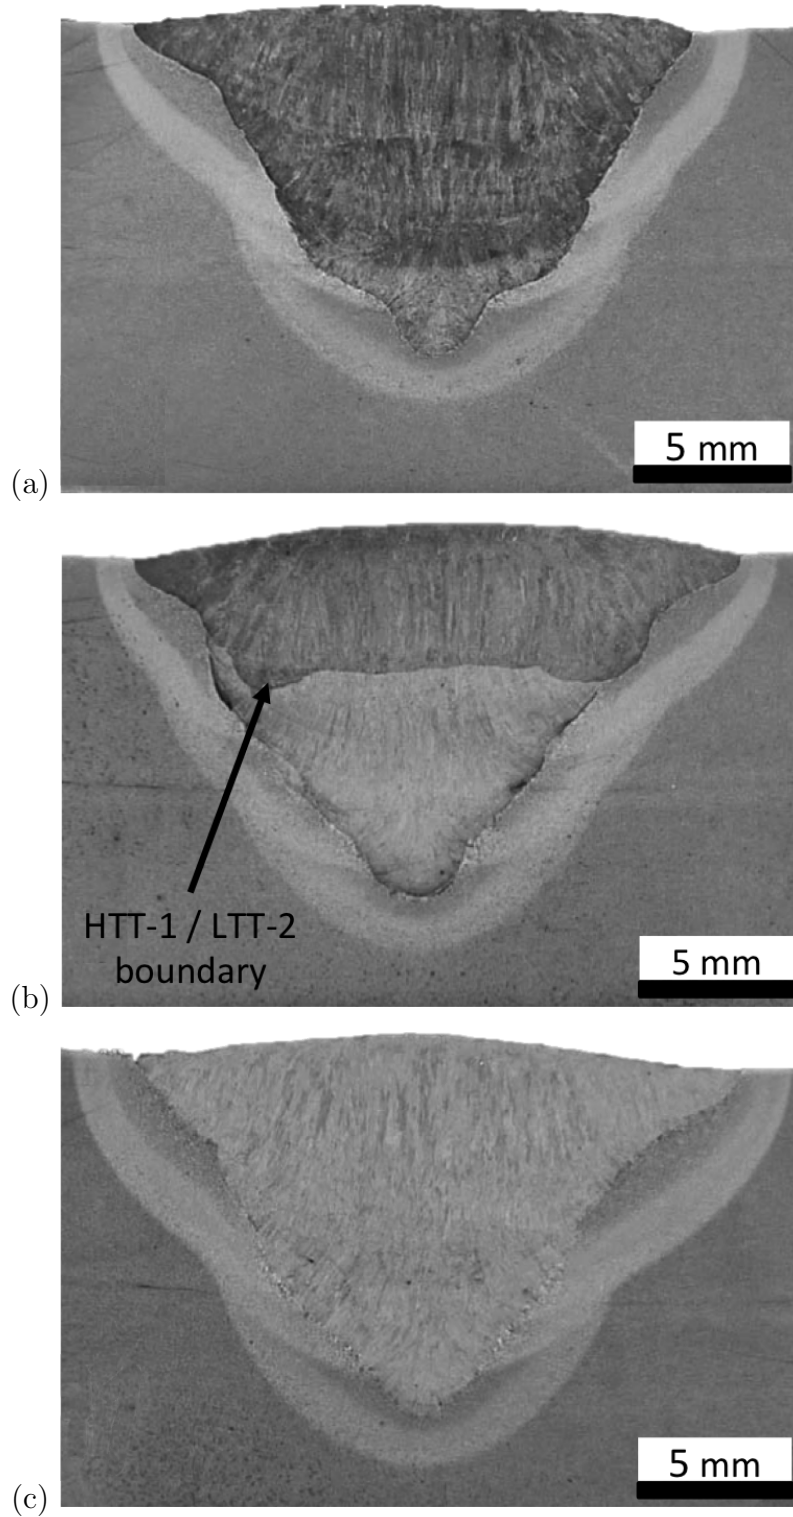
Macrostructures of (a) weld C, (b) weld G, (c) weld H.
